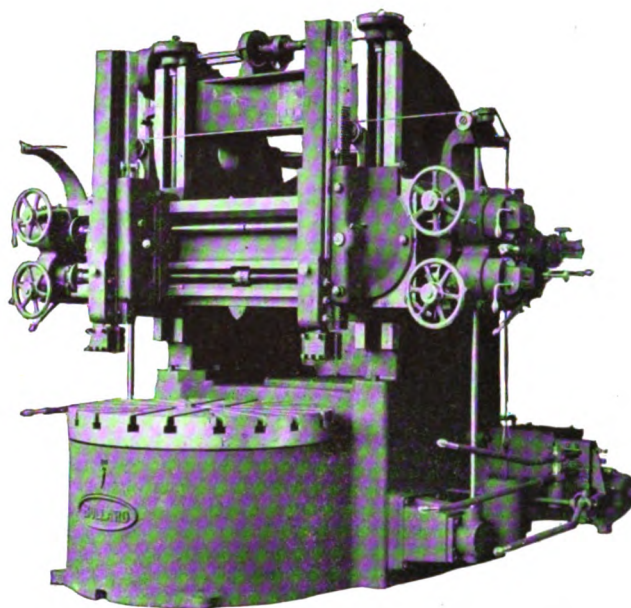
THE BULLARD 61-INCH (1549 mm.) MAXI-MILL FRONT VIEW
